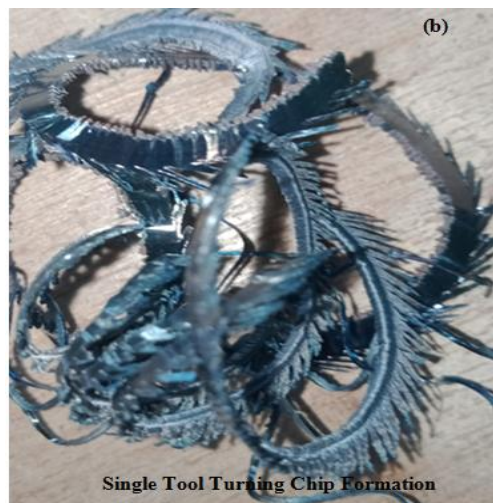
Micrograph of chips: (b) Single Tool Turning
